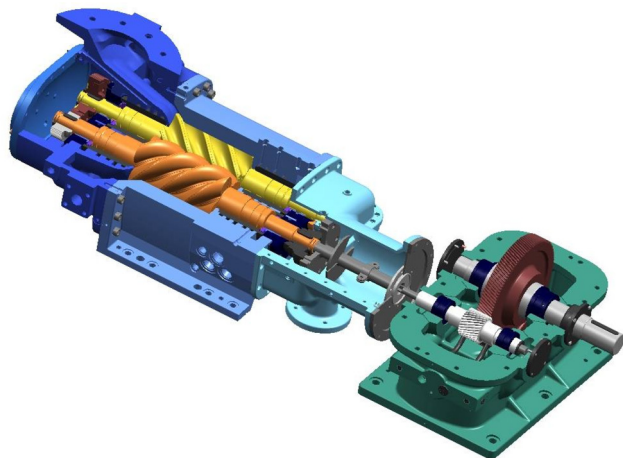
Three-dimensional View of Dry Screw Compressor with Driving Gearbox
